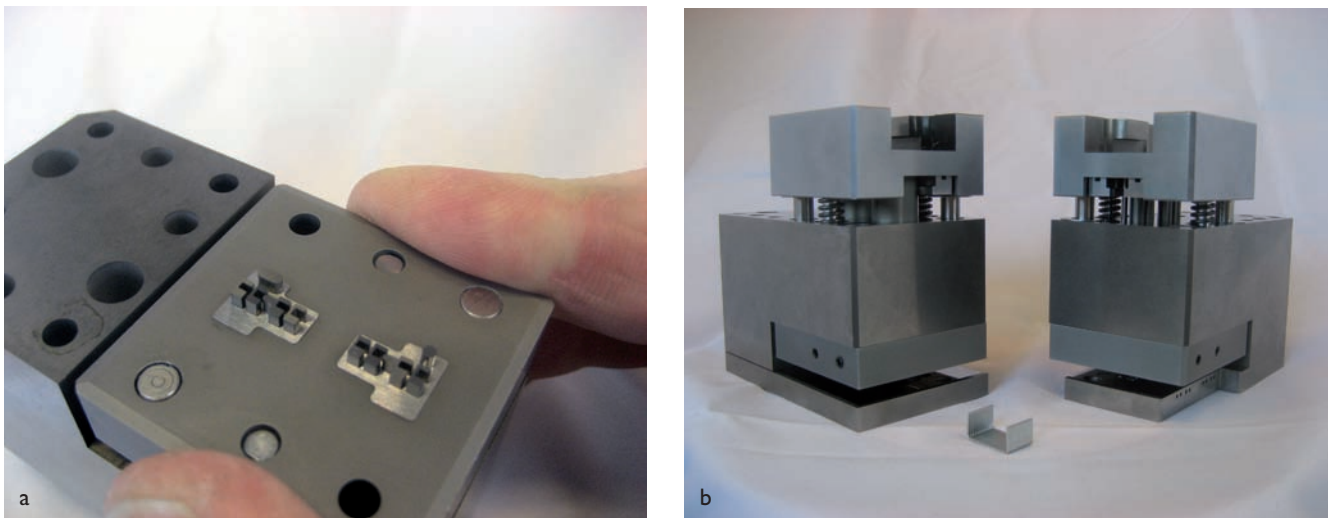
A punch tool for a hearing aid component from 20 µm thick sheet metal.
